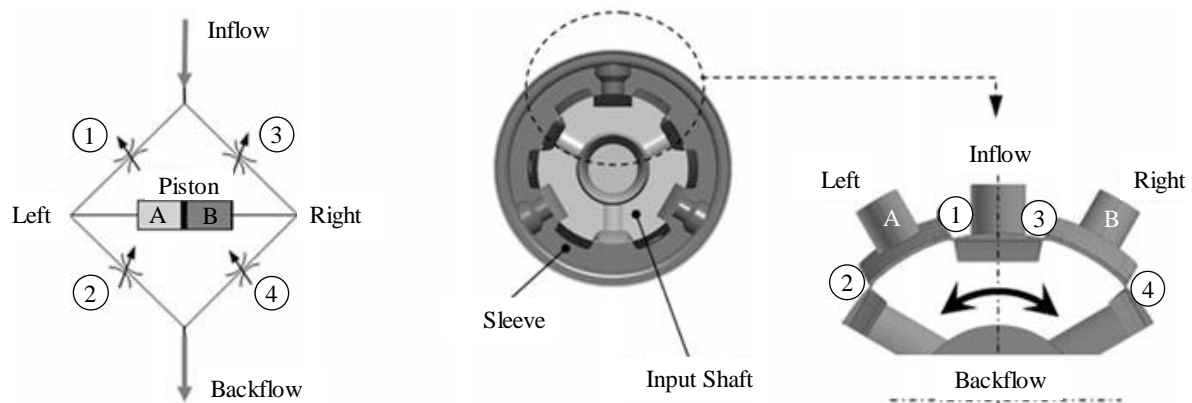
Hydraulic diagram and cutaway view of a rotary slide valve<sup>29b</sup>
